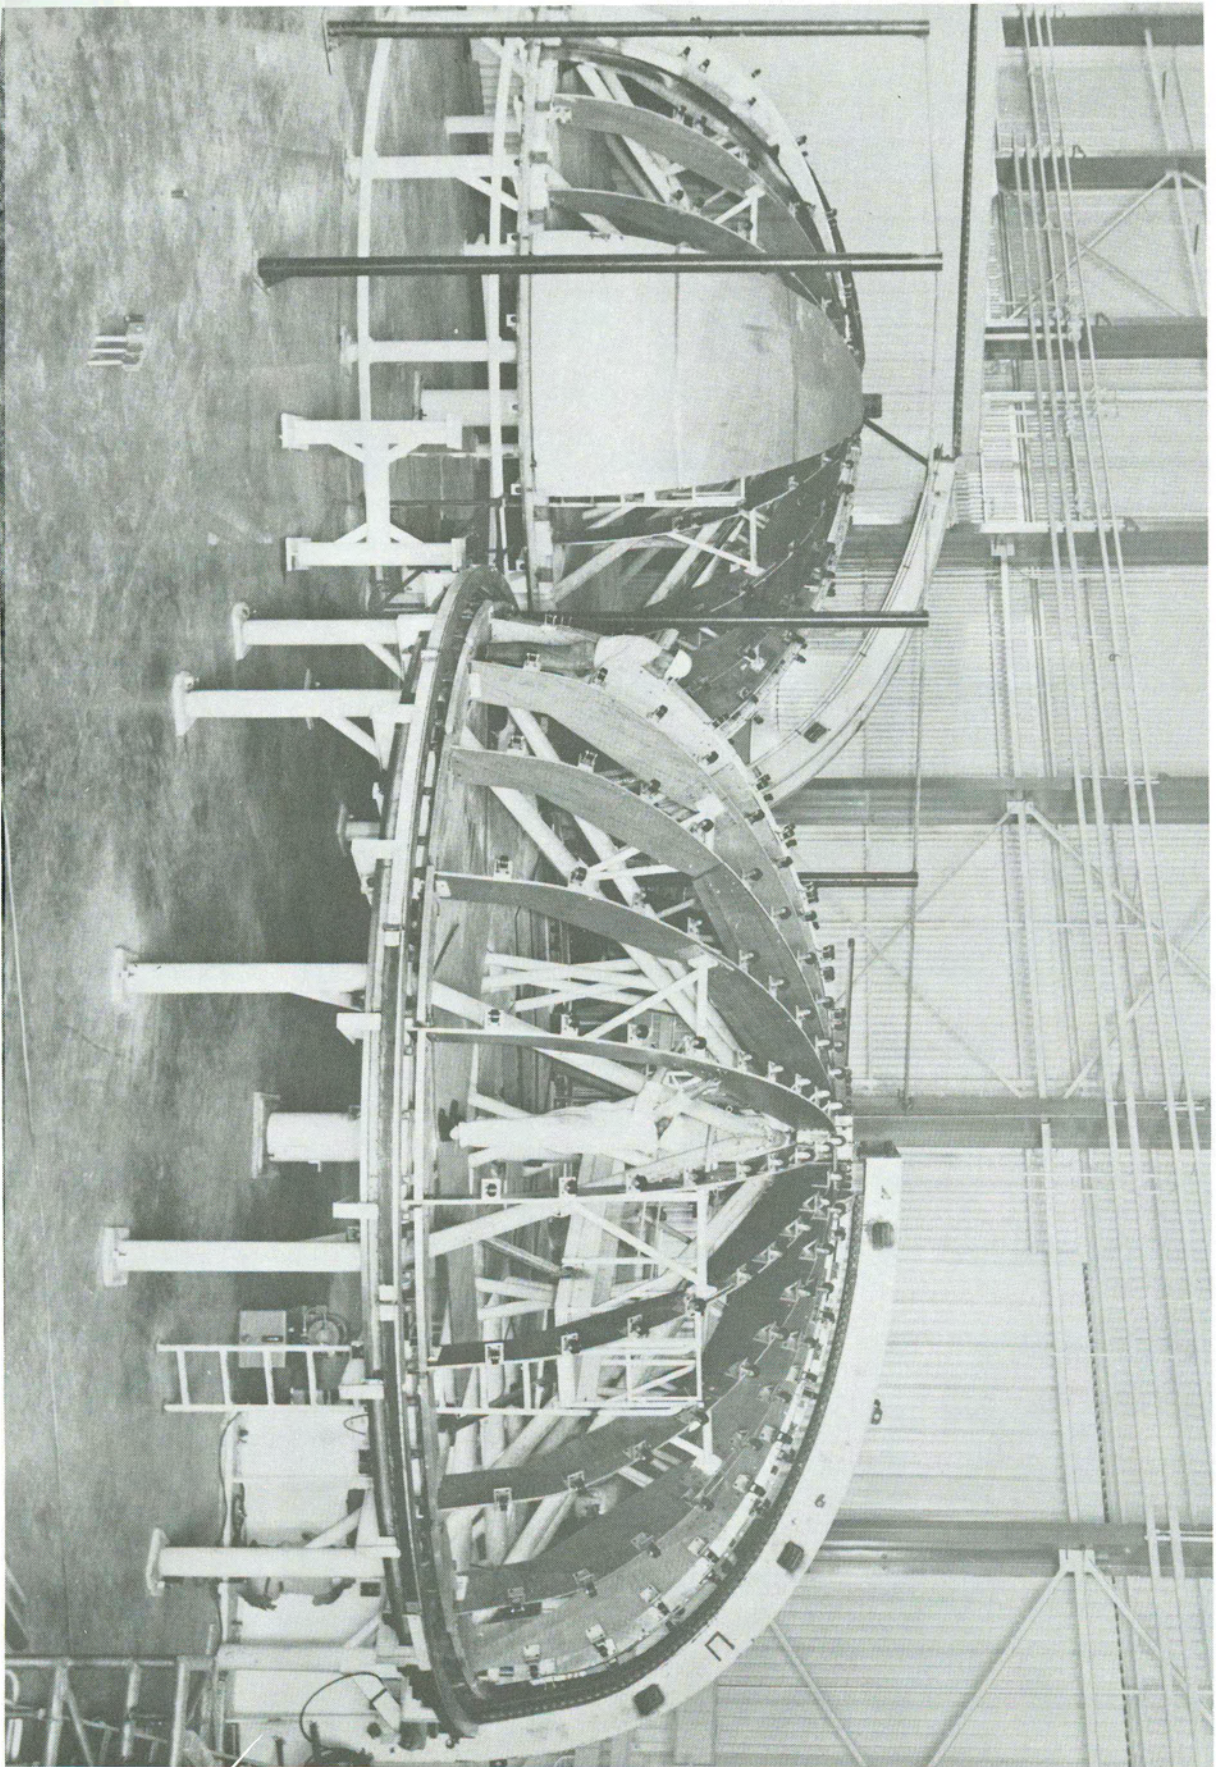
WELDING FIXTURES - The aft common bulkhead (left) and the forward common bulkhead
